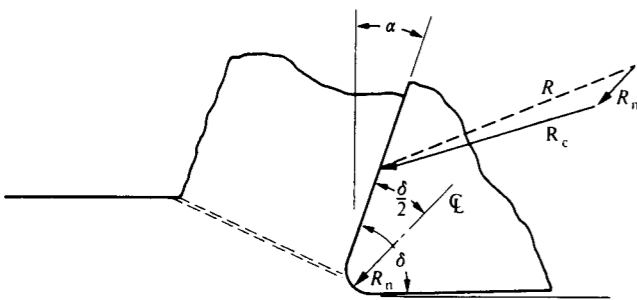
Influence of tool tip radius on cutting forces. [R_n = Indenting force due to tool radius. R_c = Resultant cutting force on remainder of tool face.] (after Masuko, 1953)
